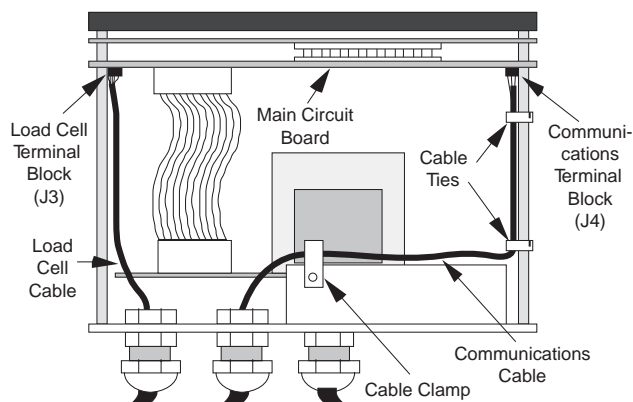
TOP VIEW WITH CASE REMOVED
